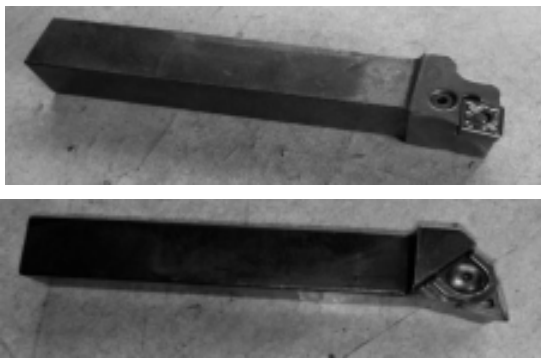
„C“ & „T“ Cutting tool insert with tool holder
